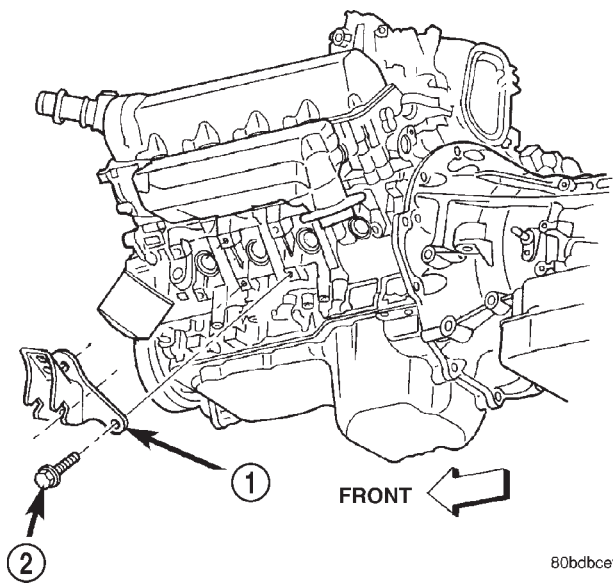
Engine Insulator Mount 4x2 Vehicle—Right Side
